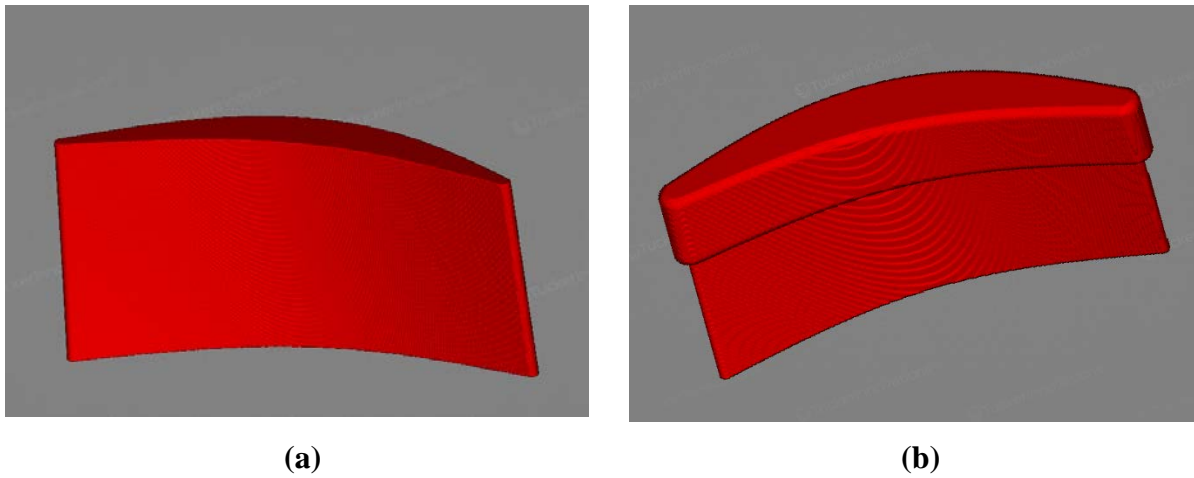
Turbine blade models (a) nominal and (b) with weld
